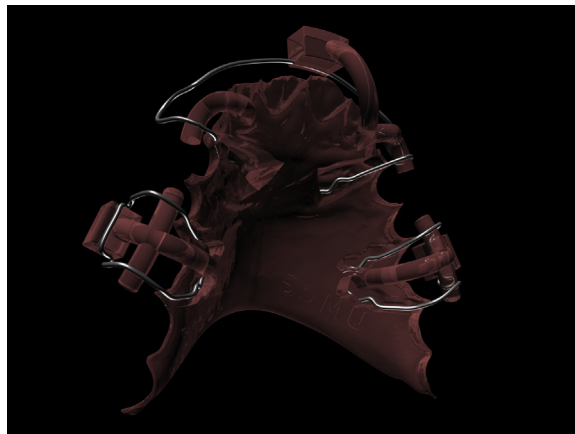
The design for the 3-dimensional printed part with support arms to position the wire parts correctly.
